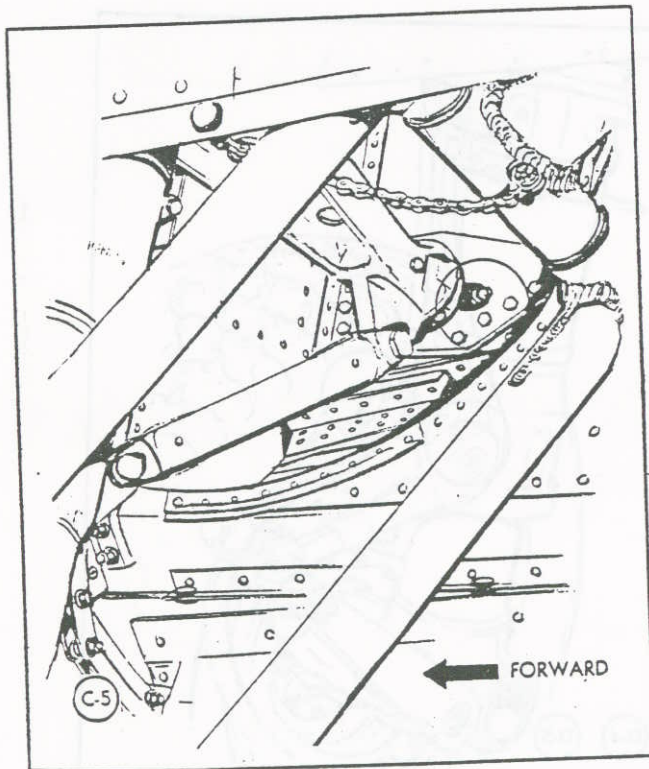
(Sheet 3 of 6 Sheets) — Lubrication Diagram
